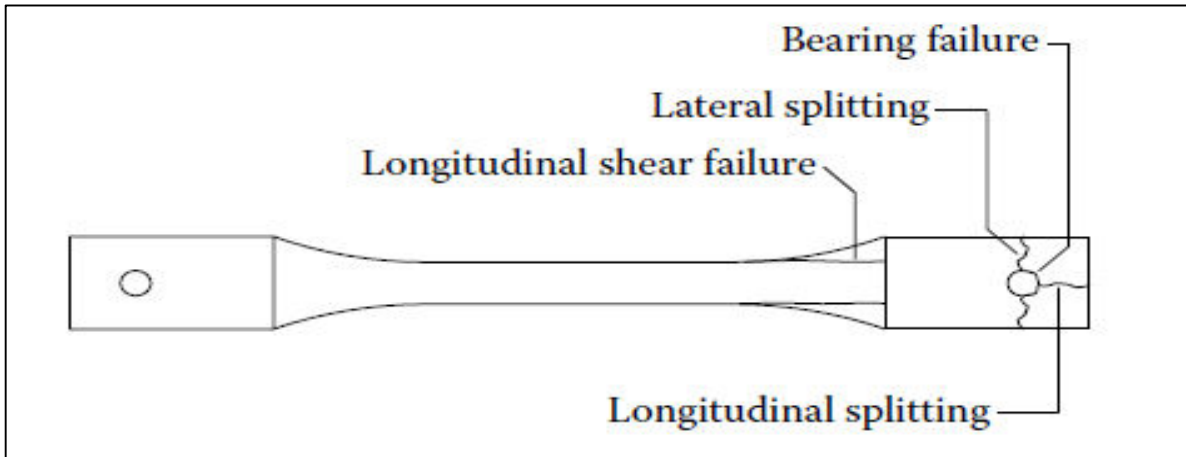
A dog-bone-shaped tensile test specimen with end holes is a variation of the standard dog-bone or dumb-bell-shaped specimen, commonly used in tensile testing [93].
